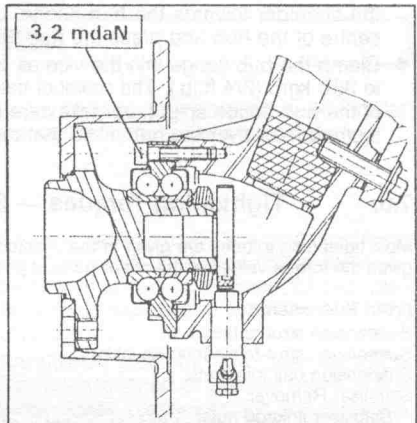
The wheel hubs are attached by five bolts to the suspension arm and can be removed without any problems. Note the tightening torque.
